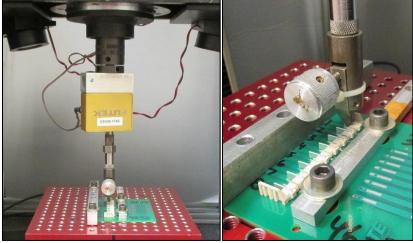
Typical Header Retention Pull Off Force Test Setup
